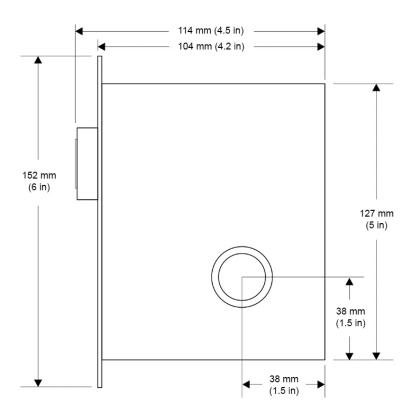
RDP-110C Mounting Dimensions and Knockout Locations (Left Side)
